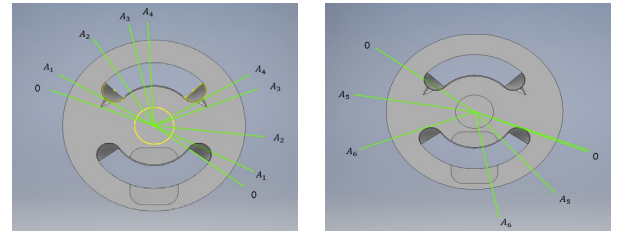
Top view of valve plate showing the angular location of different geometric features
